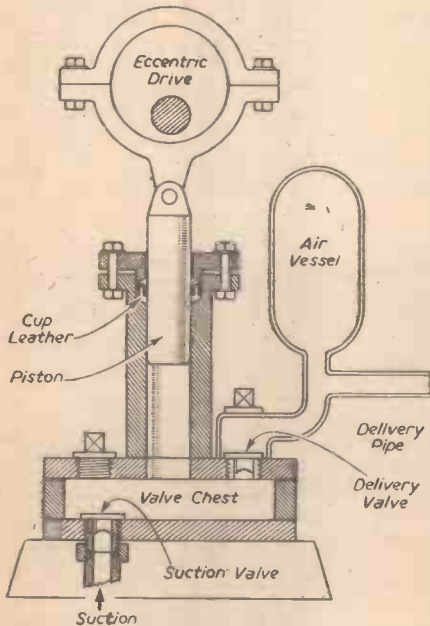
Sketch design for a simple reciprocating pump: dimensions will depend upon the duty required.
